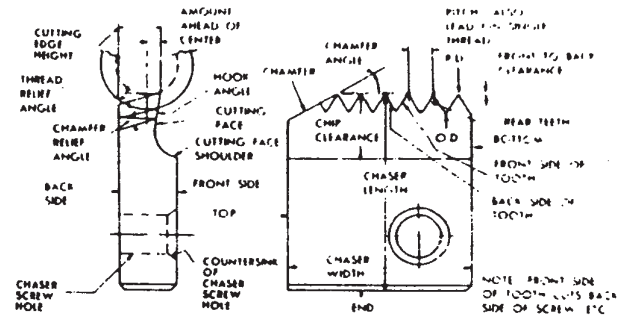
Die head chasers, blade type, tapped (R H shown)
